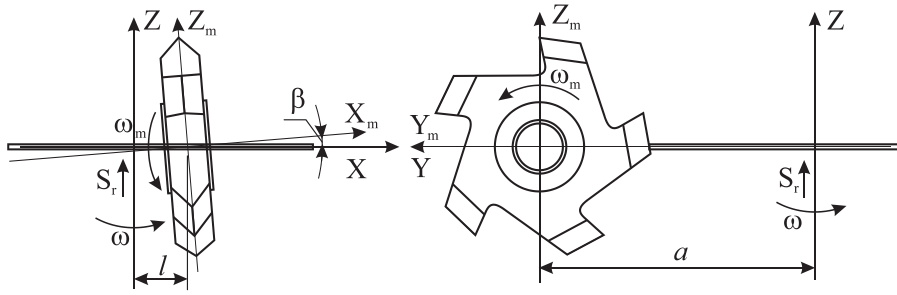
Schematic of movements of a groove cutter and a cutter blank
